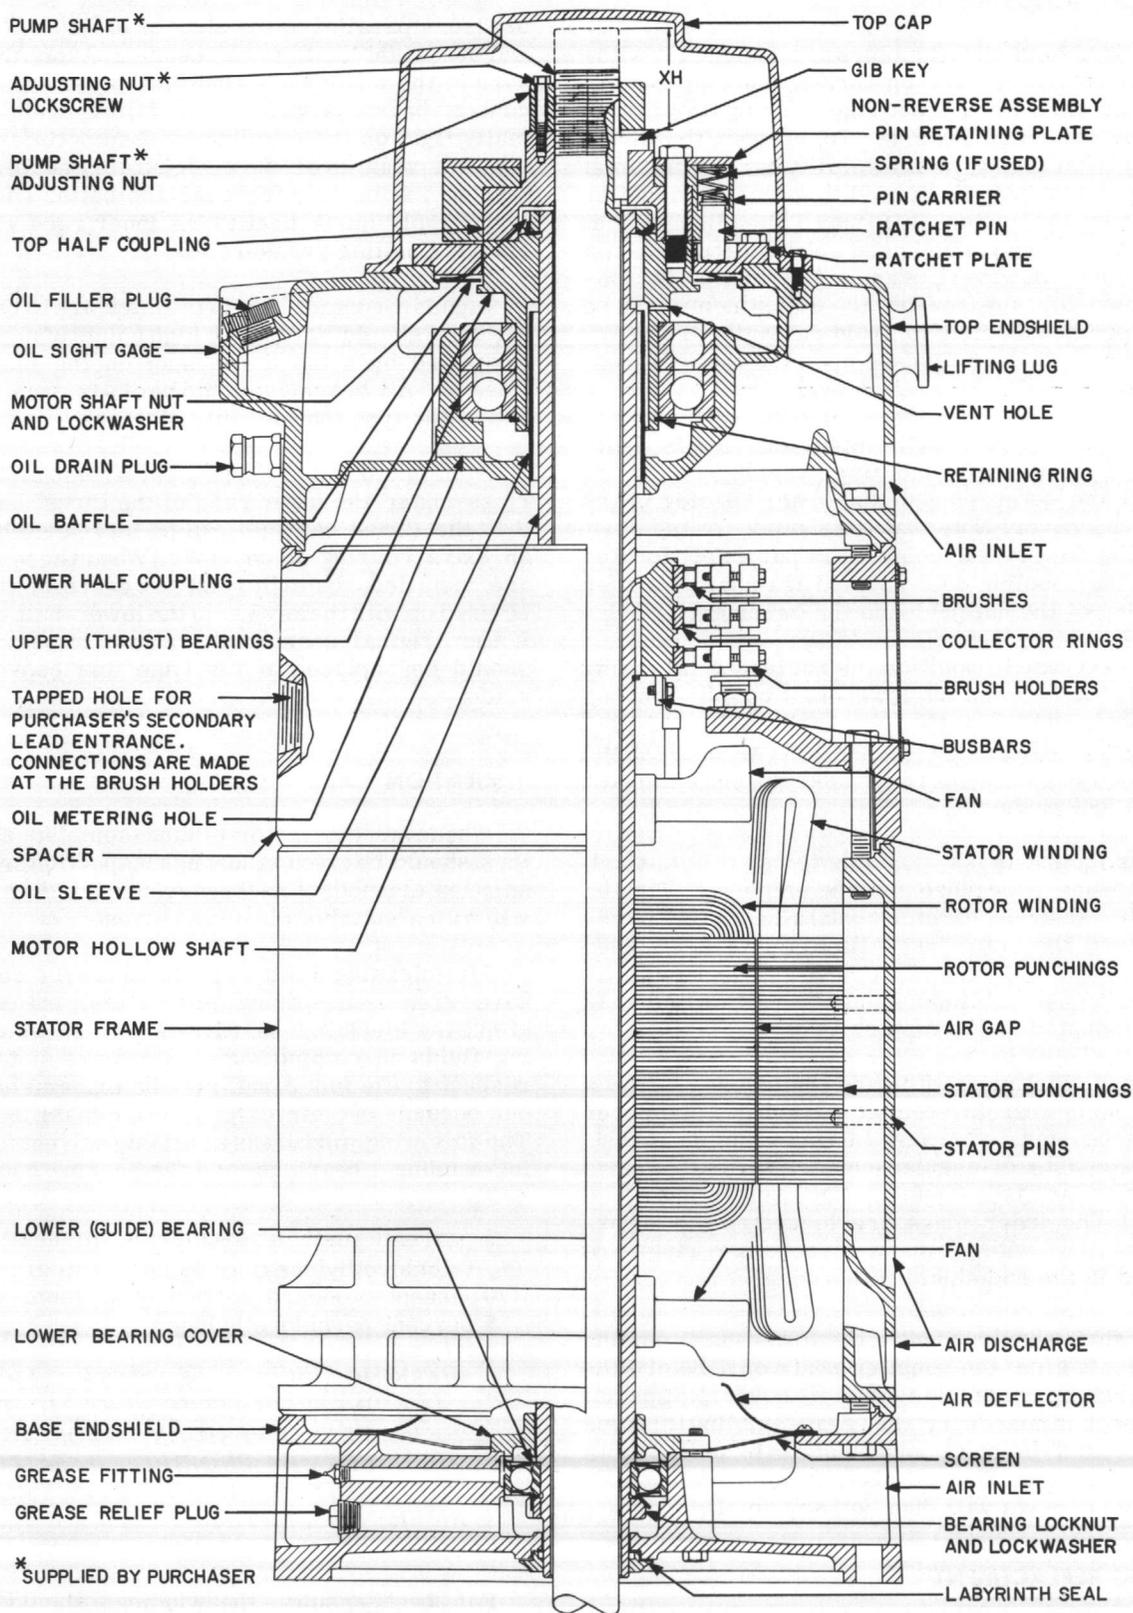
Typical hollow-shaft Type M motor with non-reverse coupling. (Self-release type coupling shown in Fig. 3.)
